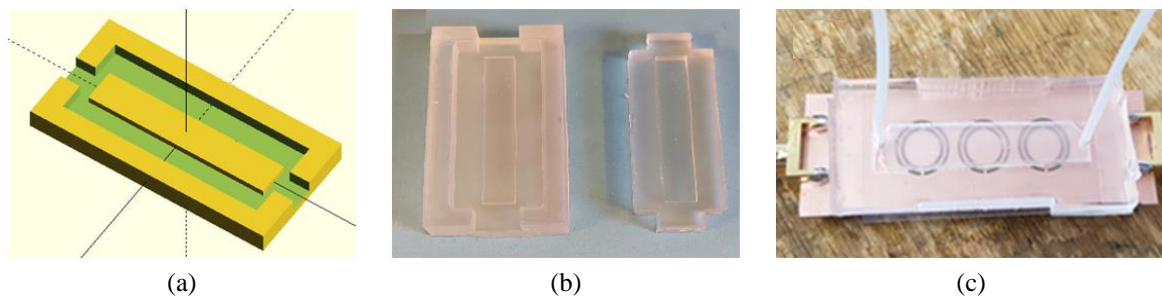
(a) Mold designed using OpenScad software, (b) printed mold and PDMS channel, and (c) final device layout where PDMS channel is integrated with MC-CSRR sensor.
